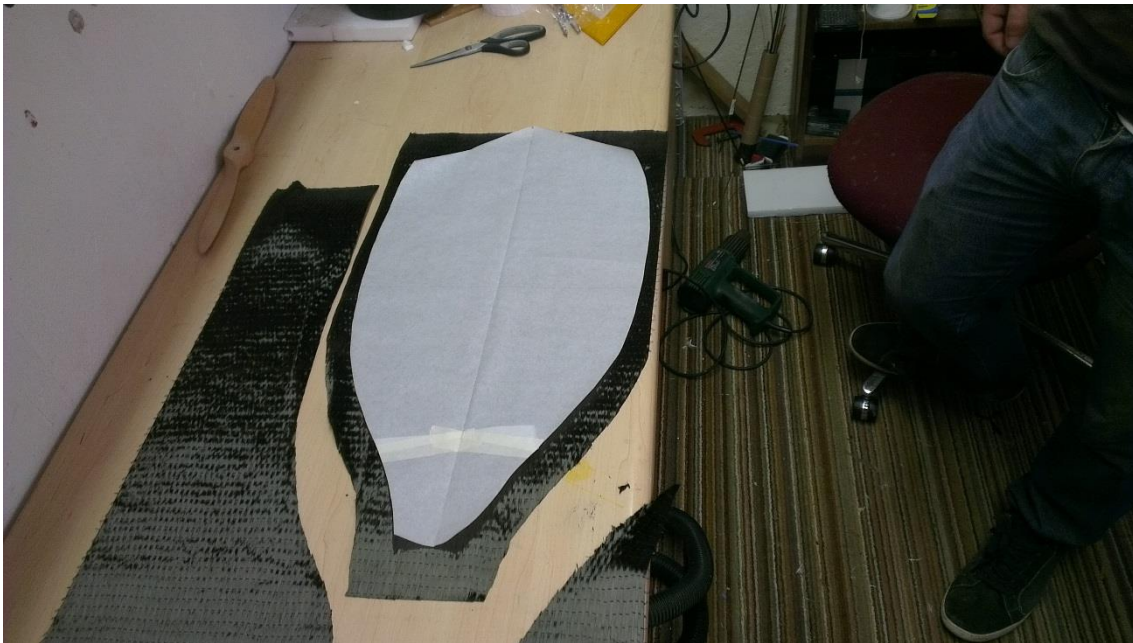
Laying out the carbon fibre sheets for cutting using a template. The baseplate sheet is shown here.
